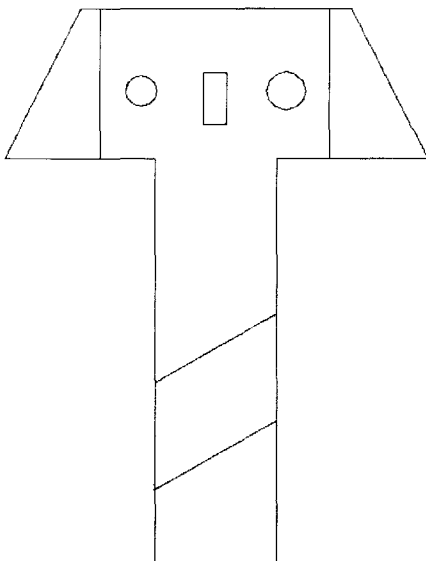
Flatpattern drawing carried out flat-pattern layout module
